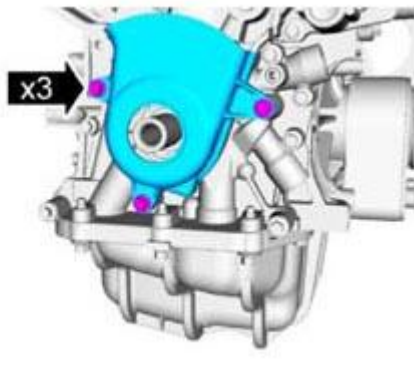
Locating Bolts And Lower Timing Belt Cover
